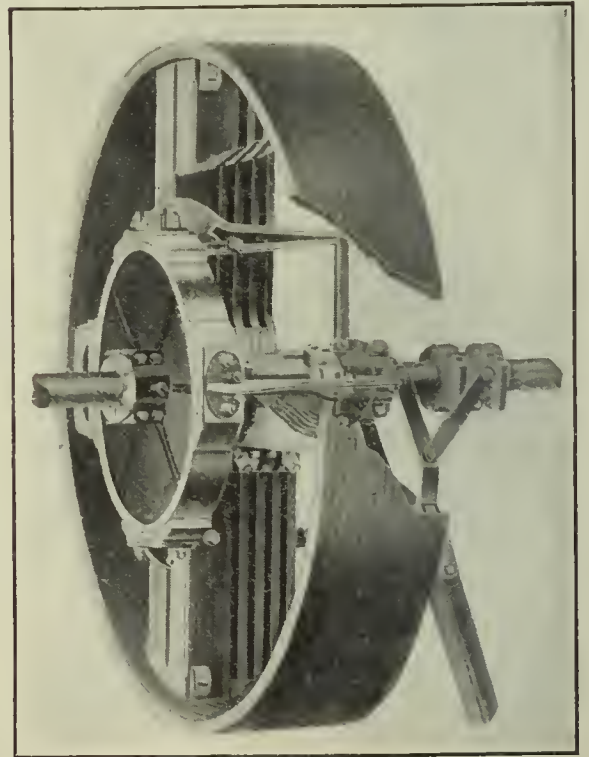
PART SECTIONAL VIEW OF REEVES CLUTCH WITH PULLEY
